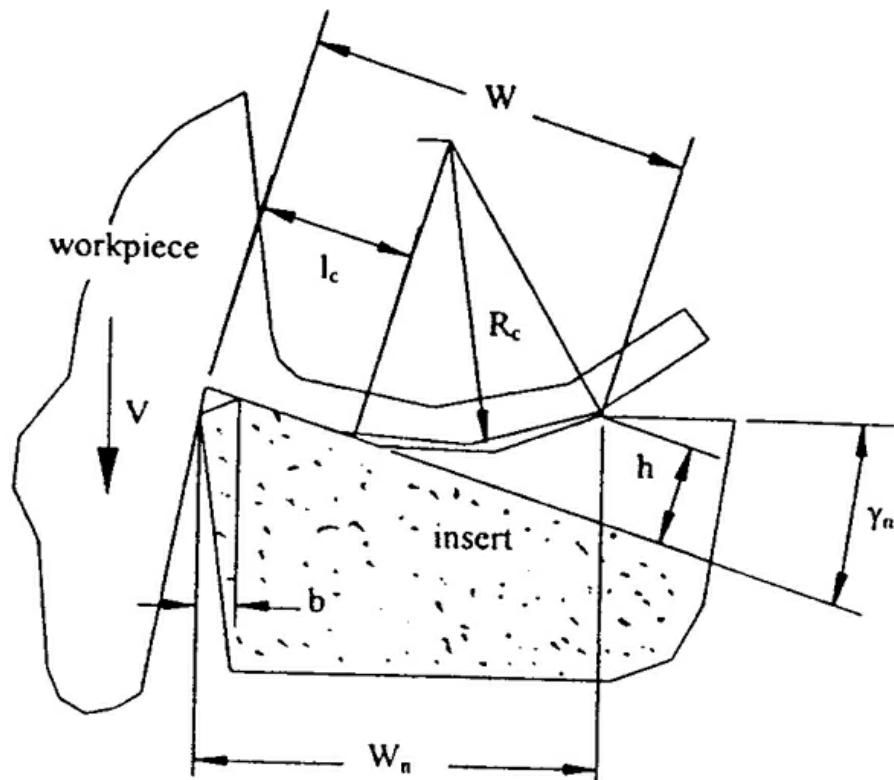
Chip Up-Curl Process with Grooved Cutting Tool (Li, Z. 1990)
